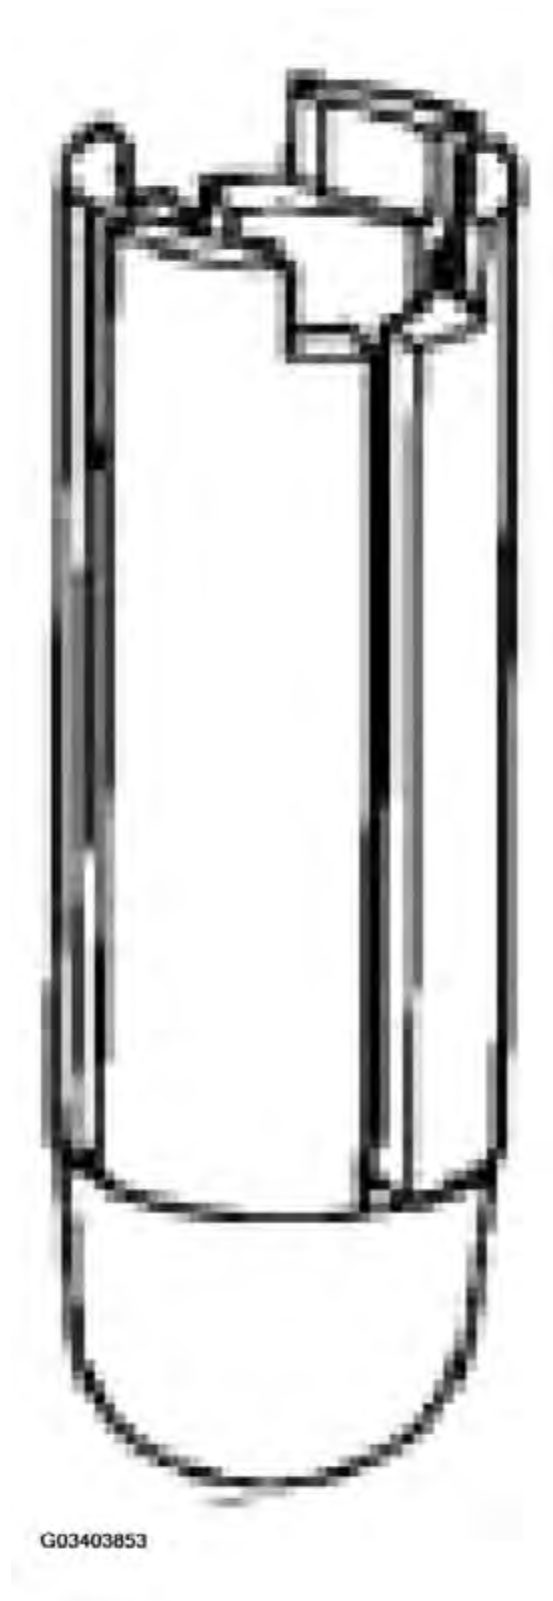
Identifying Service And Repair Tools - Tool # 24 2 310
